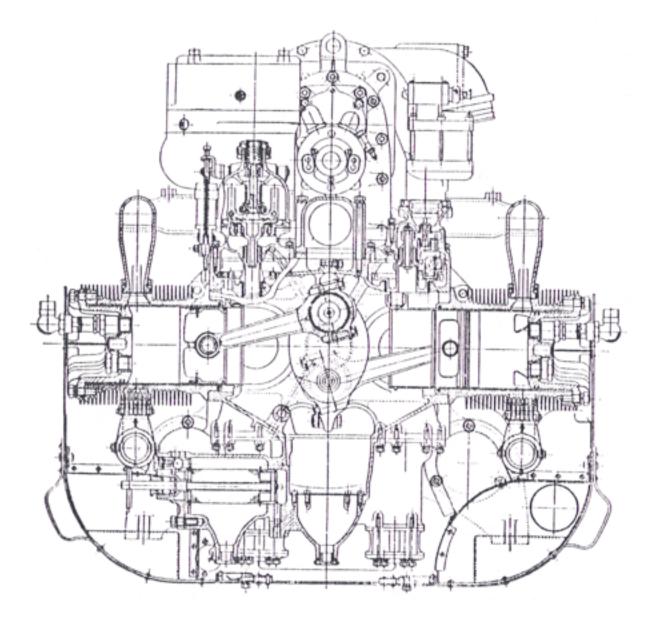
The Rotol Auxilliary Generating Plant Flat Six Engine (1943)
